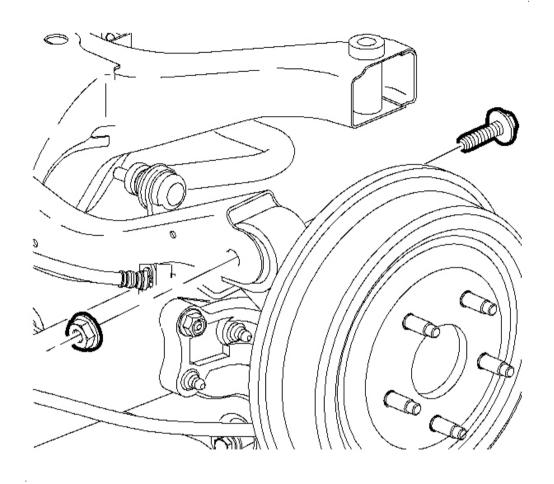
Upper Control Arm, Knuckle Bolt & Nut Courtesy of GENERAL MOTORS CORP.
